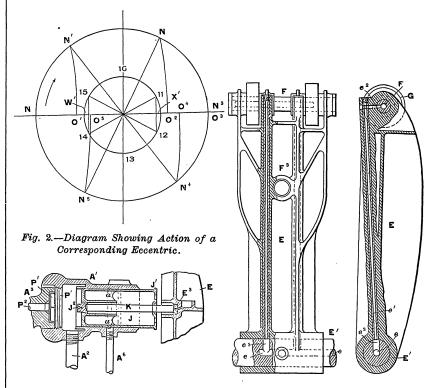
Enlarged View of Cylinder A' of Fig. 5.
